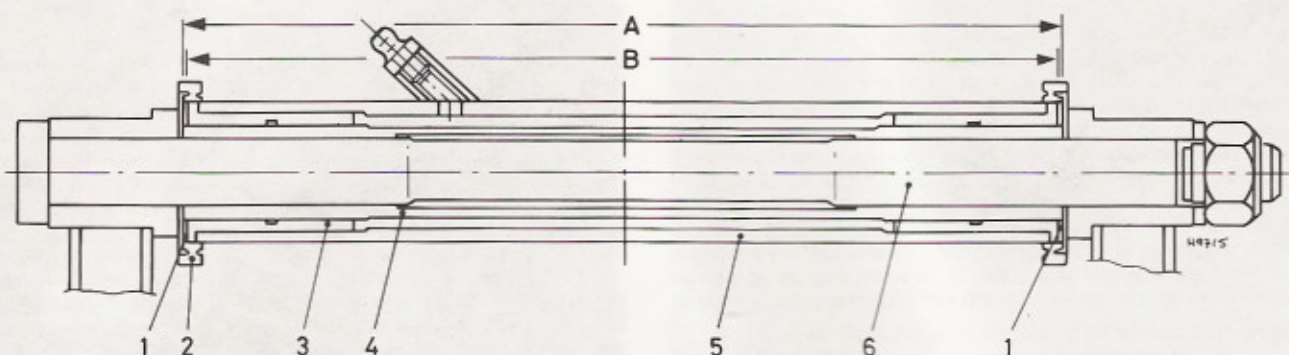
Cross-section of swinging arm pivot components and side clearance measurement datum points - RD350 LC II
